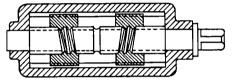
Opposite-hand threads make a high-speed centering clamp out of two moving nuts.
